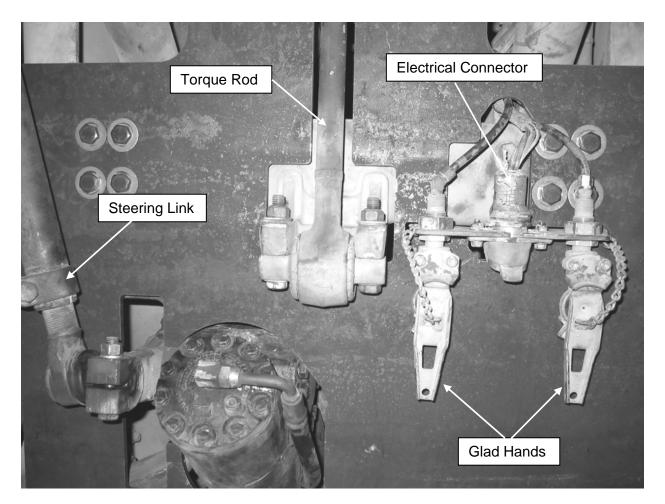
Steering Link, Torque Rod, Glad Hands, and Electrical Connector re-installed.
